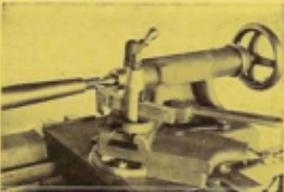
Cutting a Screw Thread on an Axle, Screw Thread Range of Lathes, 4 to 48 per inch.
